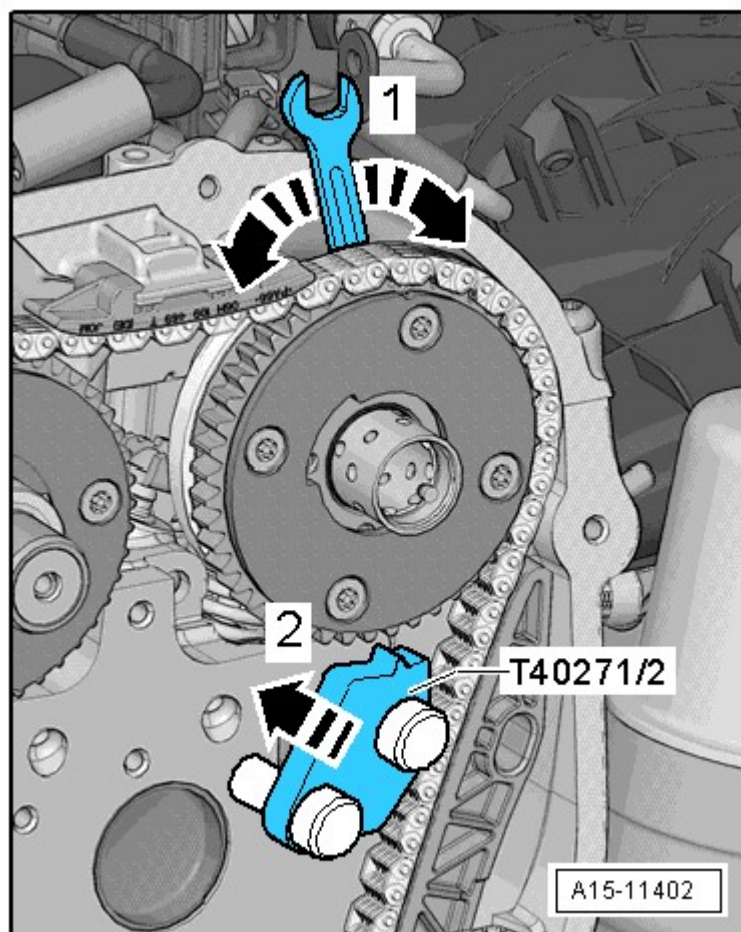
Identifying Bolt Camshaft Locating Tool T40271/2
